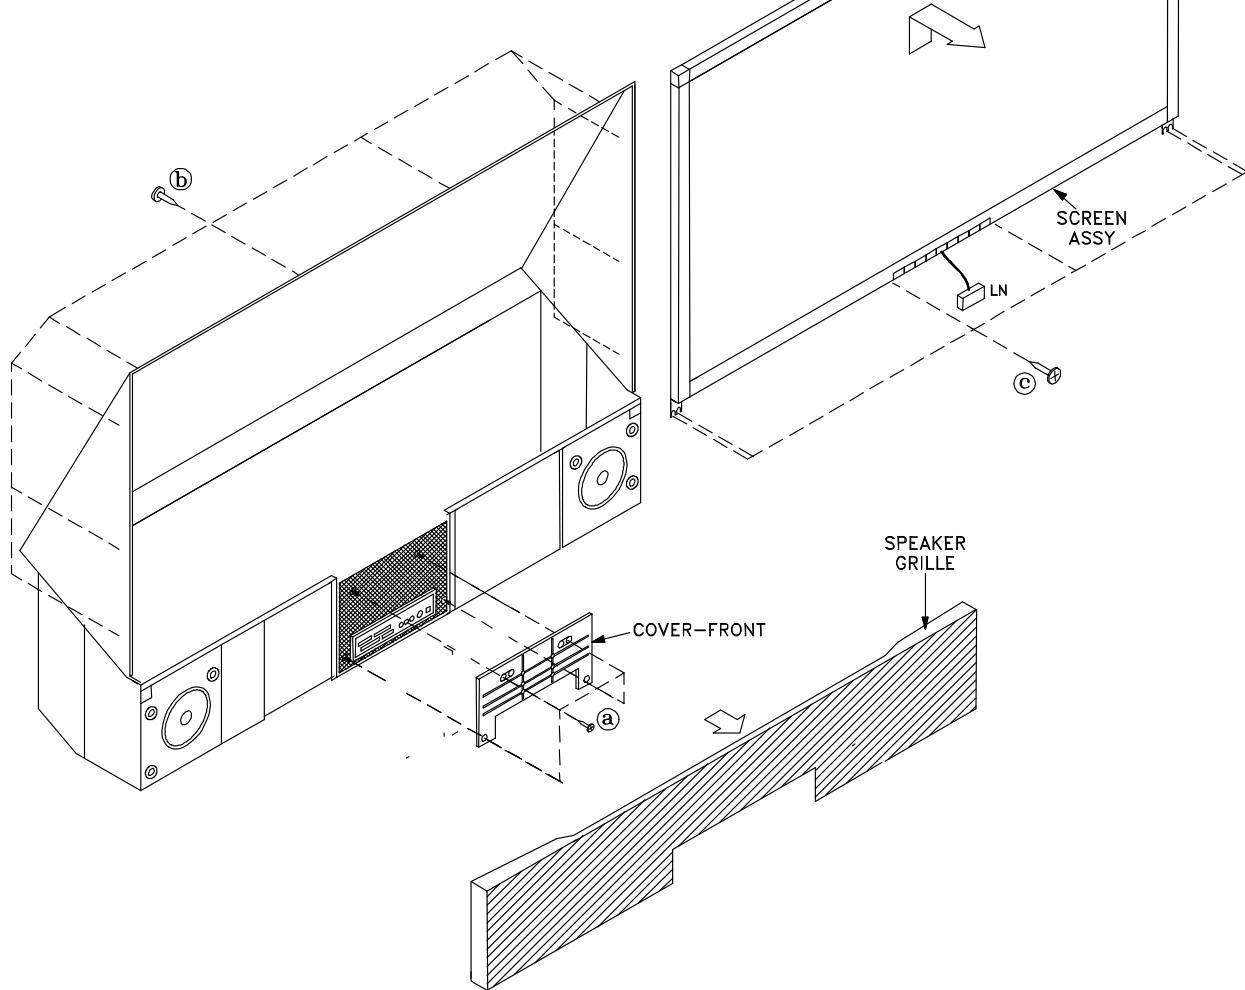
V26 & V26+ Front Cabinet Disassembly
